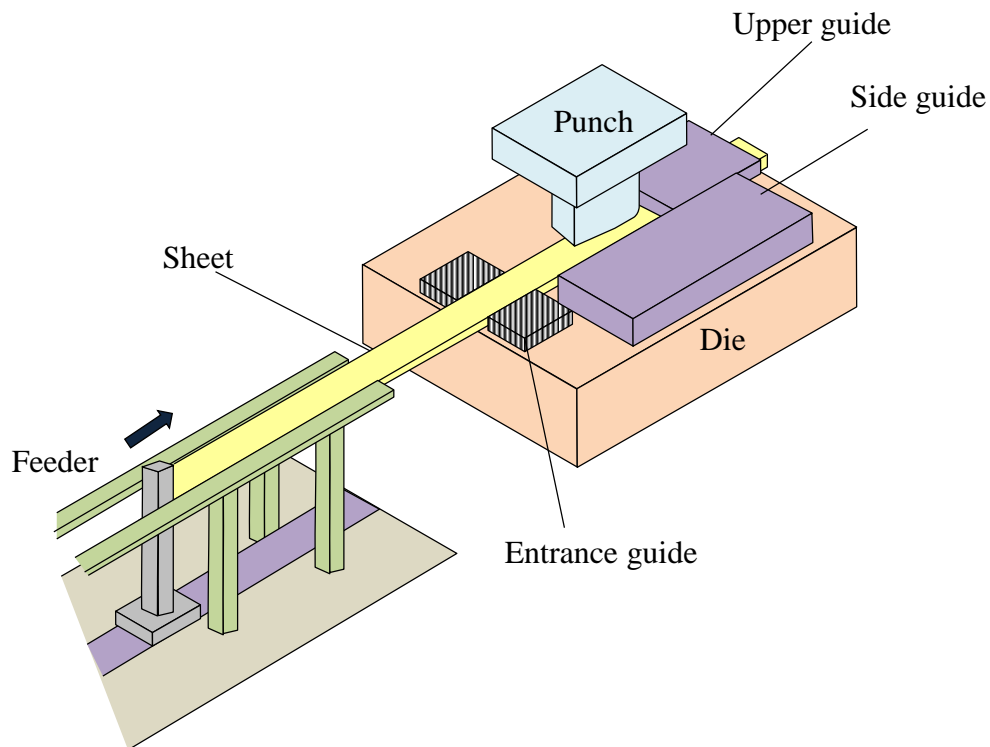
Experimental setup for successive forging of long sheet having inclined cross-section.
